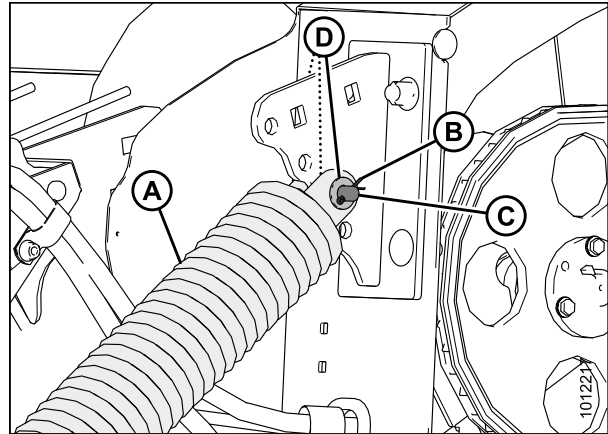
Left Side Spring Float Assembly Shown – Right Side Opposite
